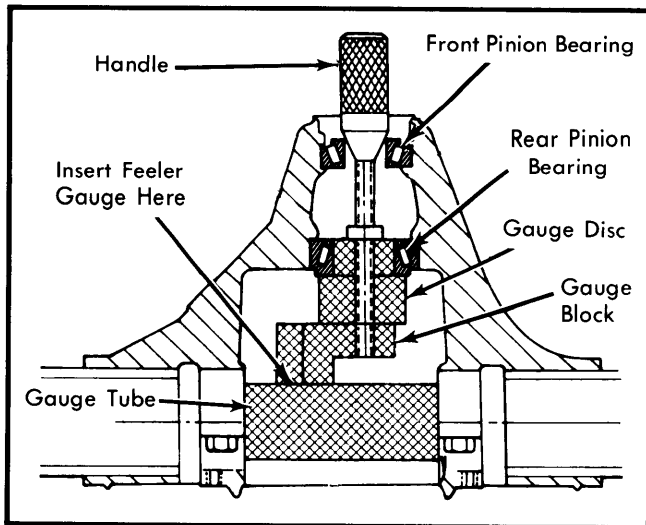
Sectional View Showing Installation of Pinion Depth Measuring Tools
